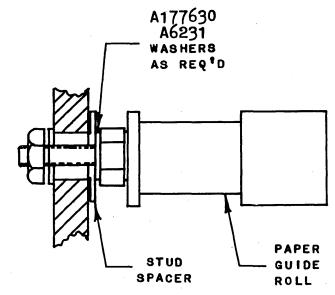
PAPER FEED ROLL ADJUSTMENT.
